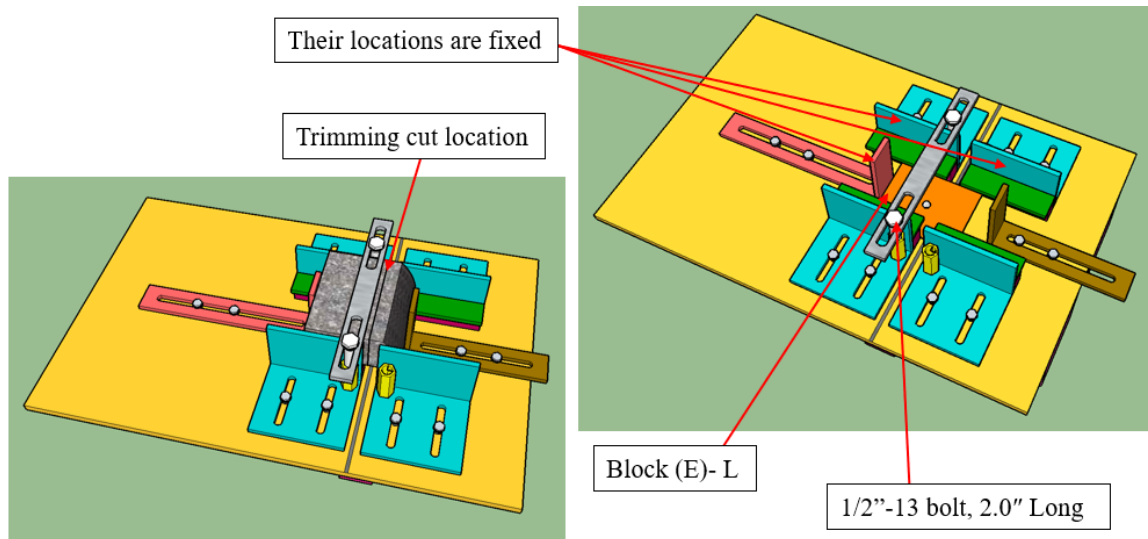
Illustration drawings to the fifth trim of RV specimens.
